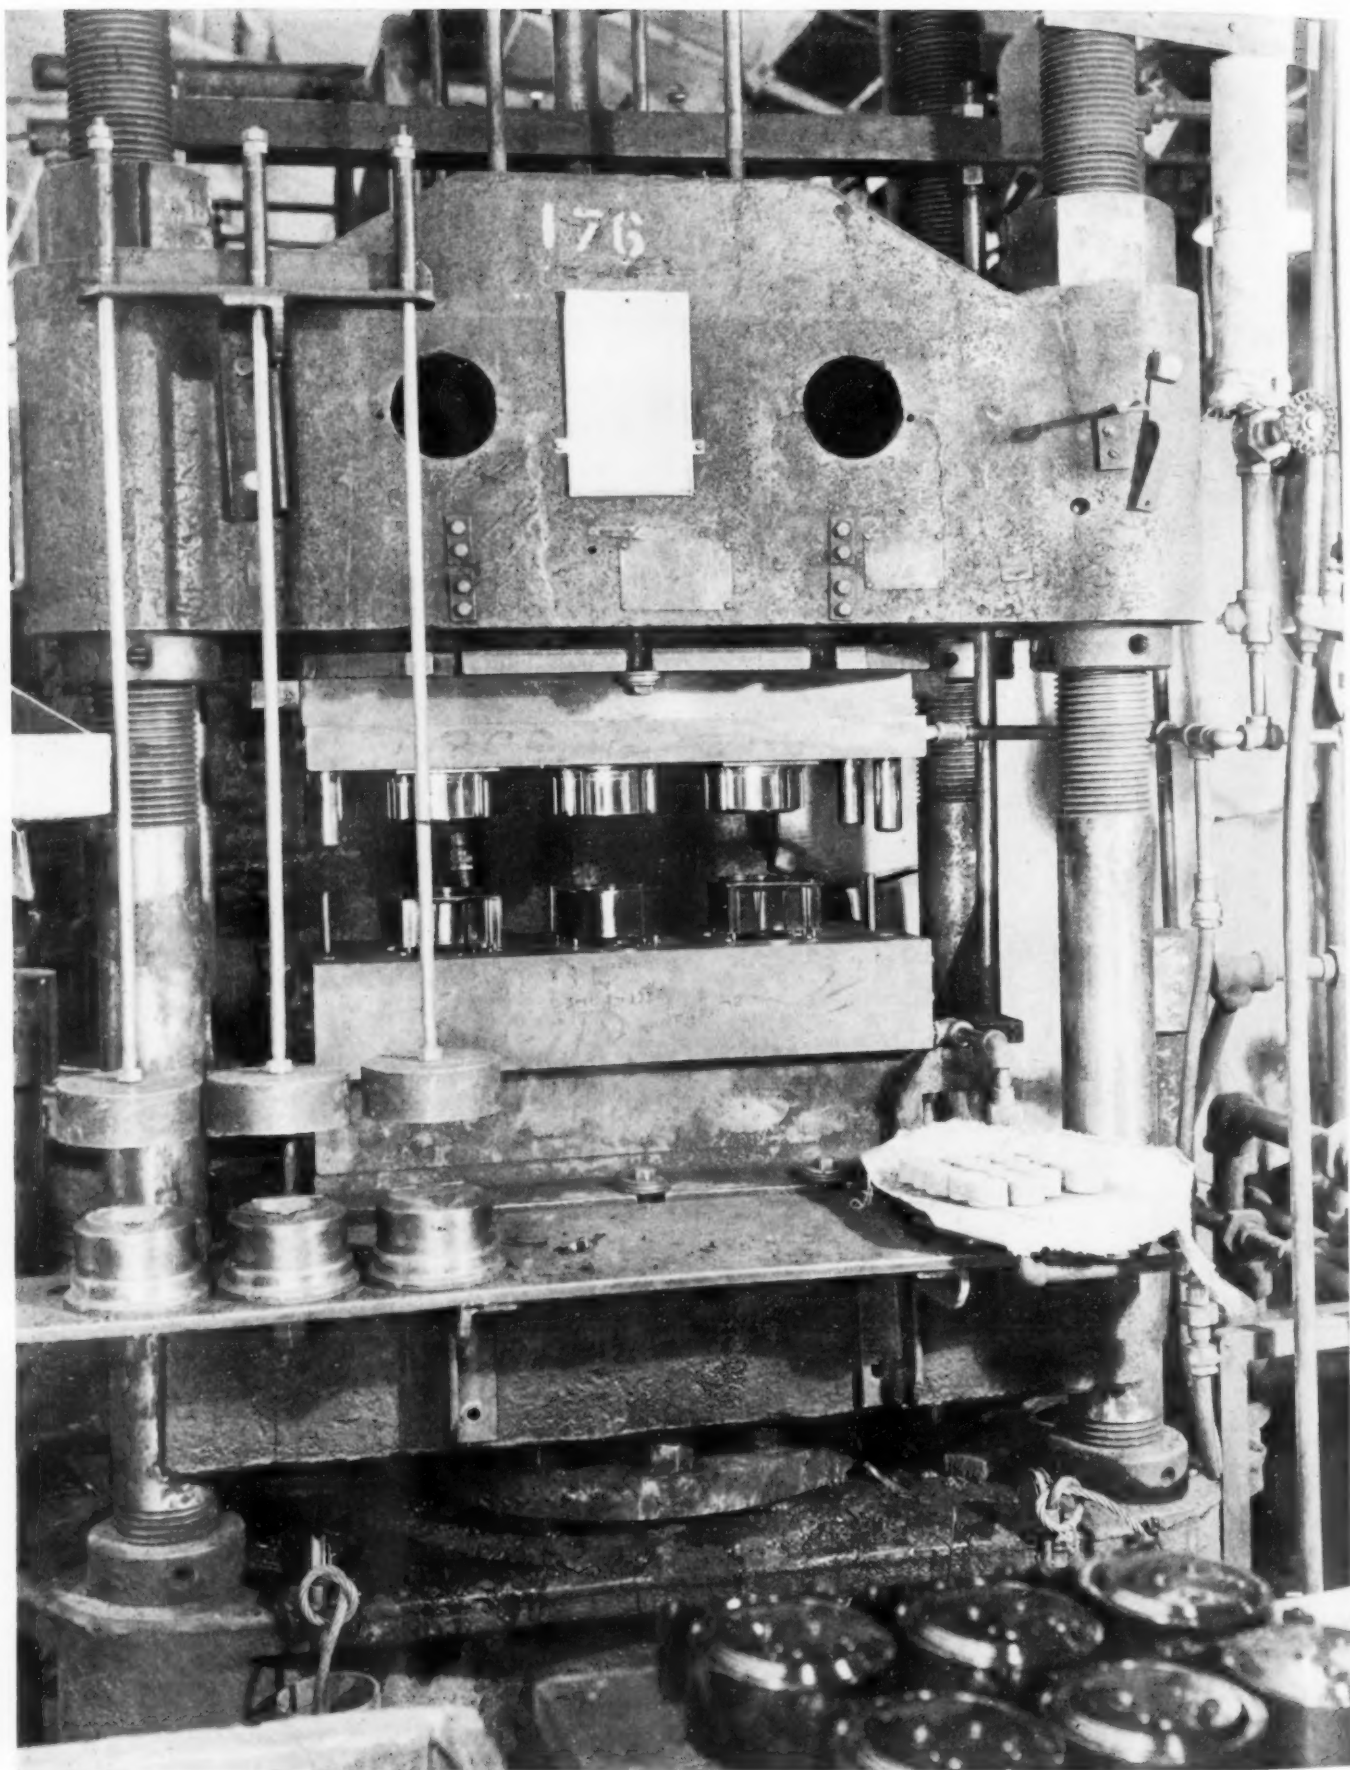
A full view of plated cavities discharging molded parts. Note high finish on plungers and finished product.
